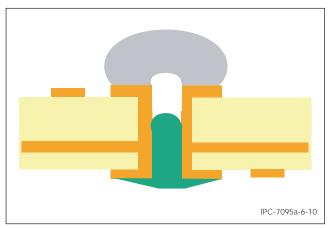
Cross Section of Via-in-Pad Design Showing Via Cap and Solder Ball
